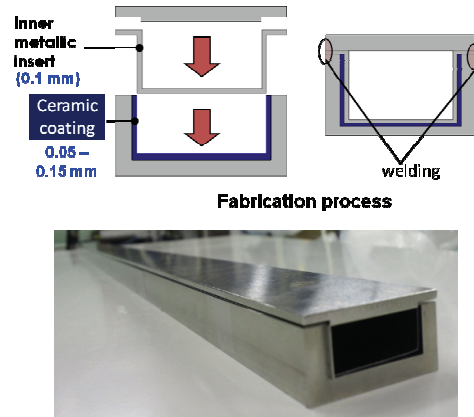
Three-surface-multi-layered channel tested in MaPLE: fabrication process and photograph of assembled test section
